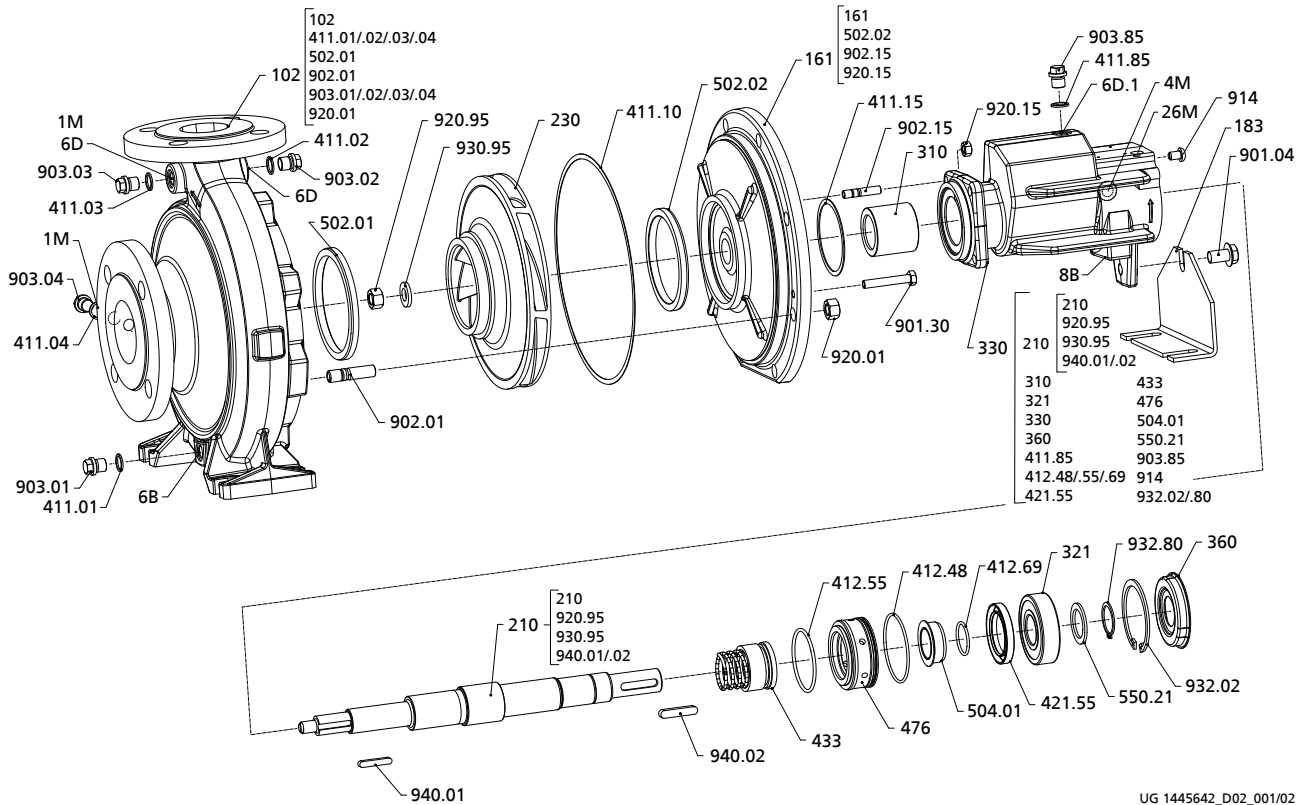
Exploded view of an Etanorm SYT, bearing bracket WS\_25\_LS
